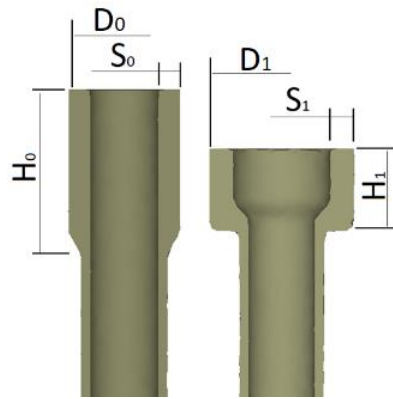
Geometric parameters of the workpiece and part after tube forming.
